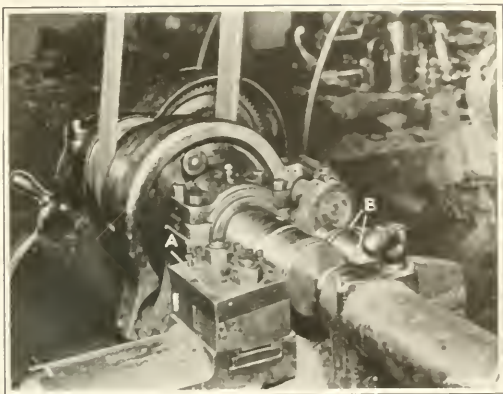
Cincinnati Lathe & Tool Co.'s 16-inch Engine Lathe tooling up for turning and burnishing Ring Grooves in Pistons
